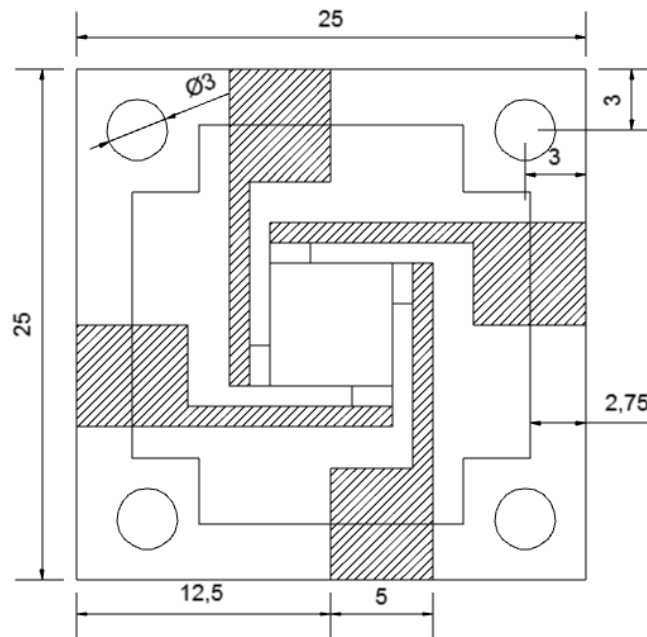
Micropositioner with Clamp in AutoCAD Drawing (Top View)
